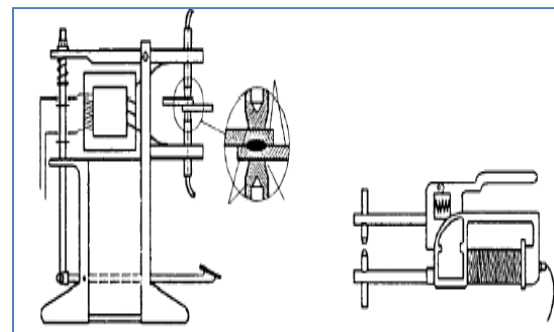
Devices and equipment for Electric resistance spot welding [12]
